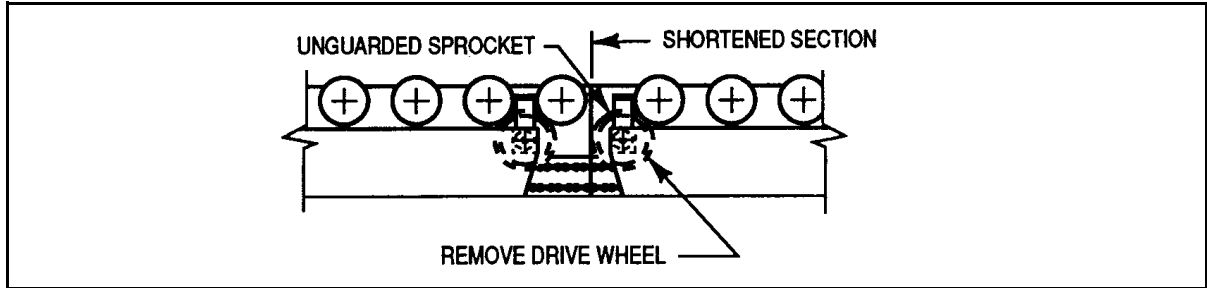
Removal of Unguarded Drive Wheel/sprocket
